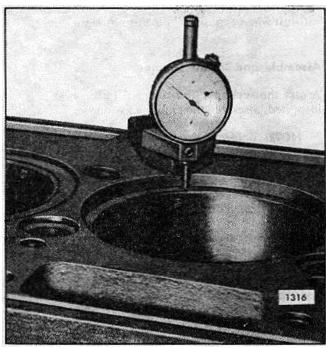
Checking Depth of Counterbore with Toot J 22273
